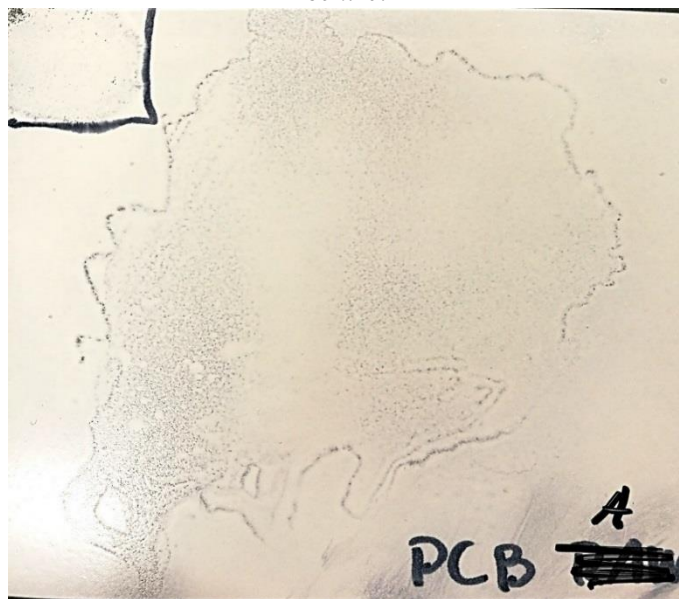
to Figure 5.8 show VSD-tests for ADHESIVE INSERTS, PCB A and PCB RAW, and LENS HOLDER.
